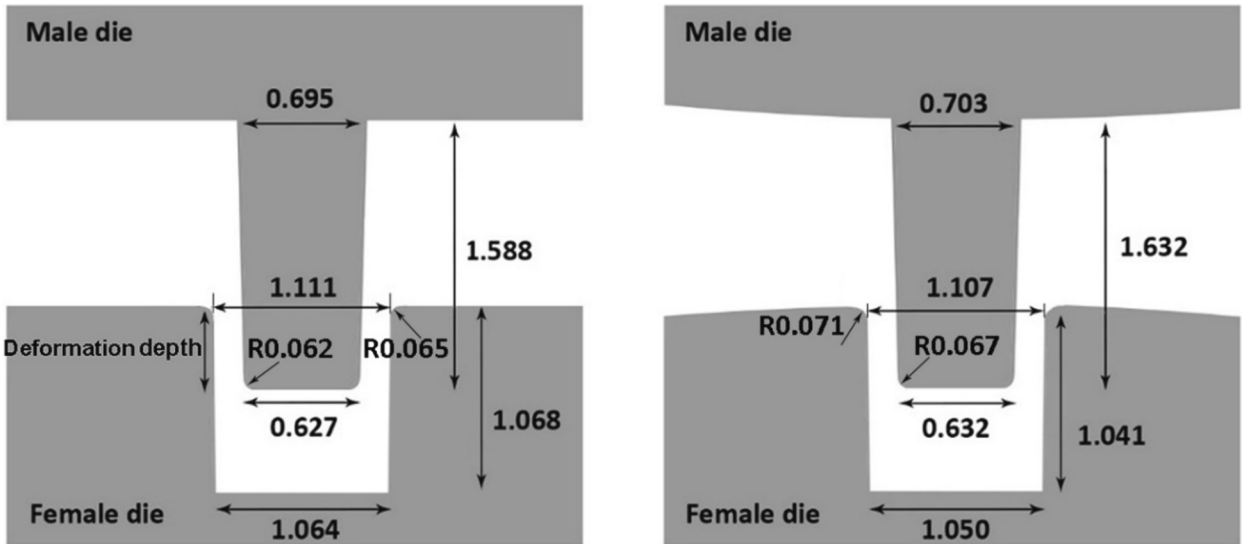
Die geometries for both web and cross-web forming, dimensions in mm.
